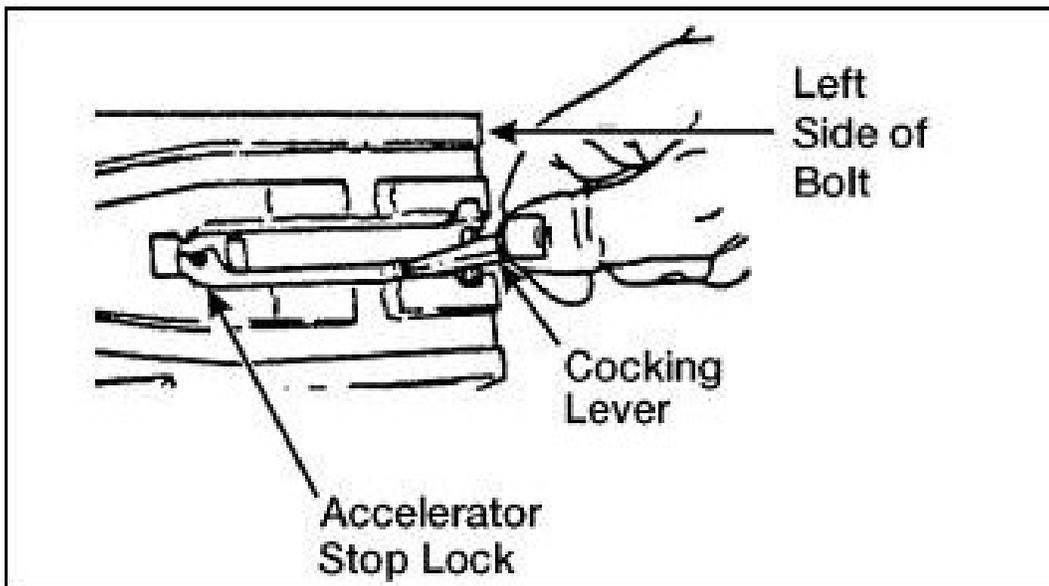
ST-1025_34 (Attachment of the accelerator stop lock)
